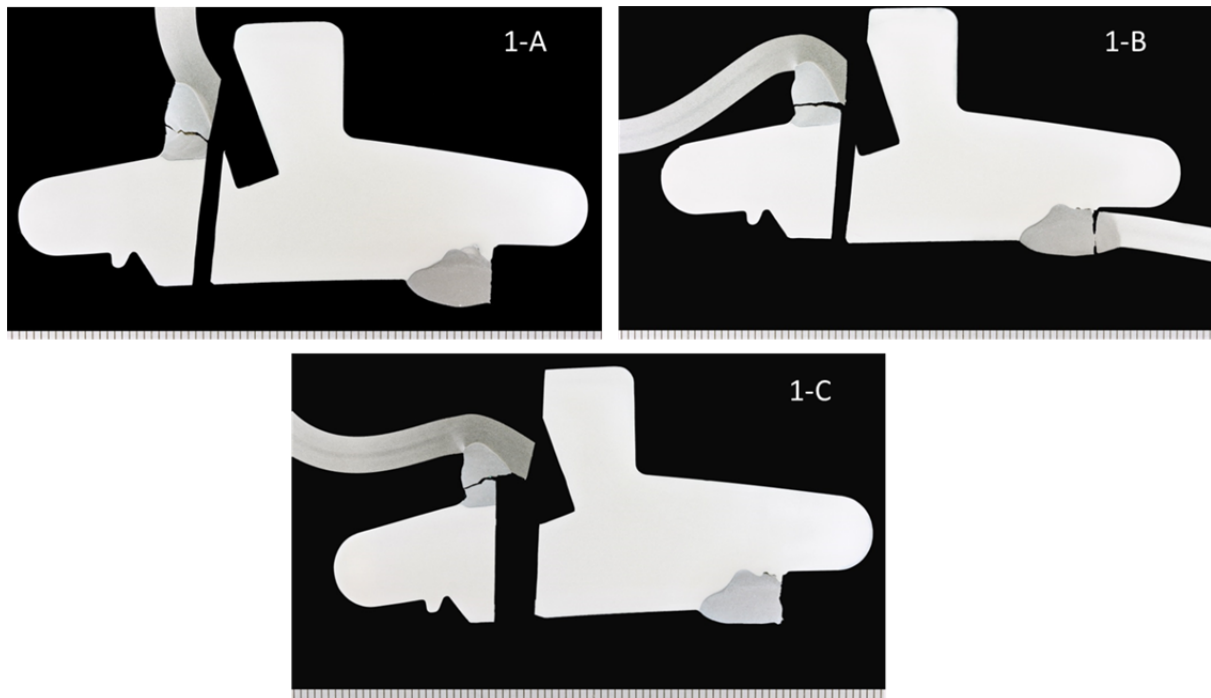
Samples 1-A, 1-B and 1-C from J2580. The large parallel gap is due to machining of the samples for previous examination of the circumferential weld. All samples show rupture through the weld throat. The tick marks indicate 1.0mm scale.
